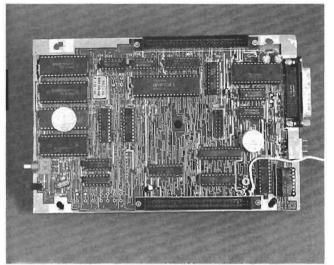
THE FINISHED CONTROLLER BOARD will look similar to this one, although this is an early prototype board. Inspect the finished boards thoroughly before beginning the system check-out.
